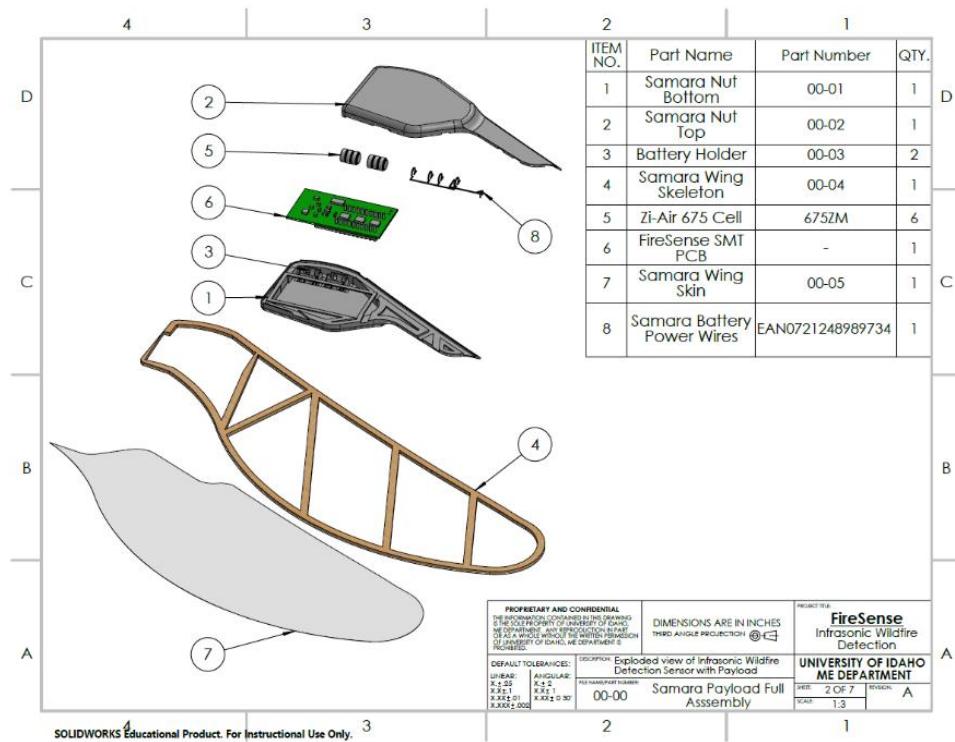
Technical Drawing Package Sheet 2, Exploded View
